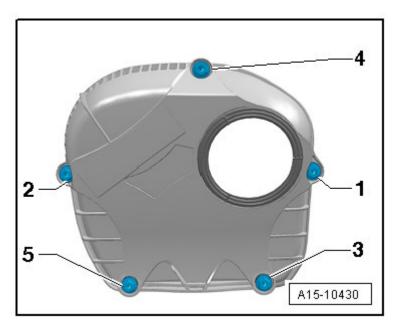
Identifying Upper Timing Chain Cover - Tightening Sequence
